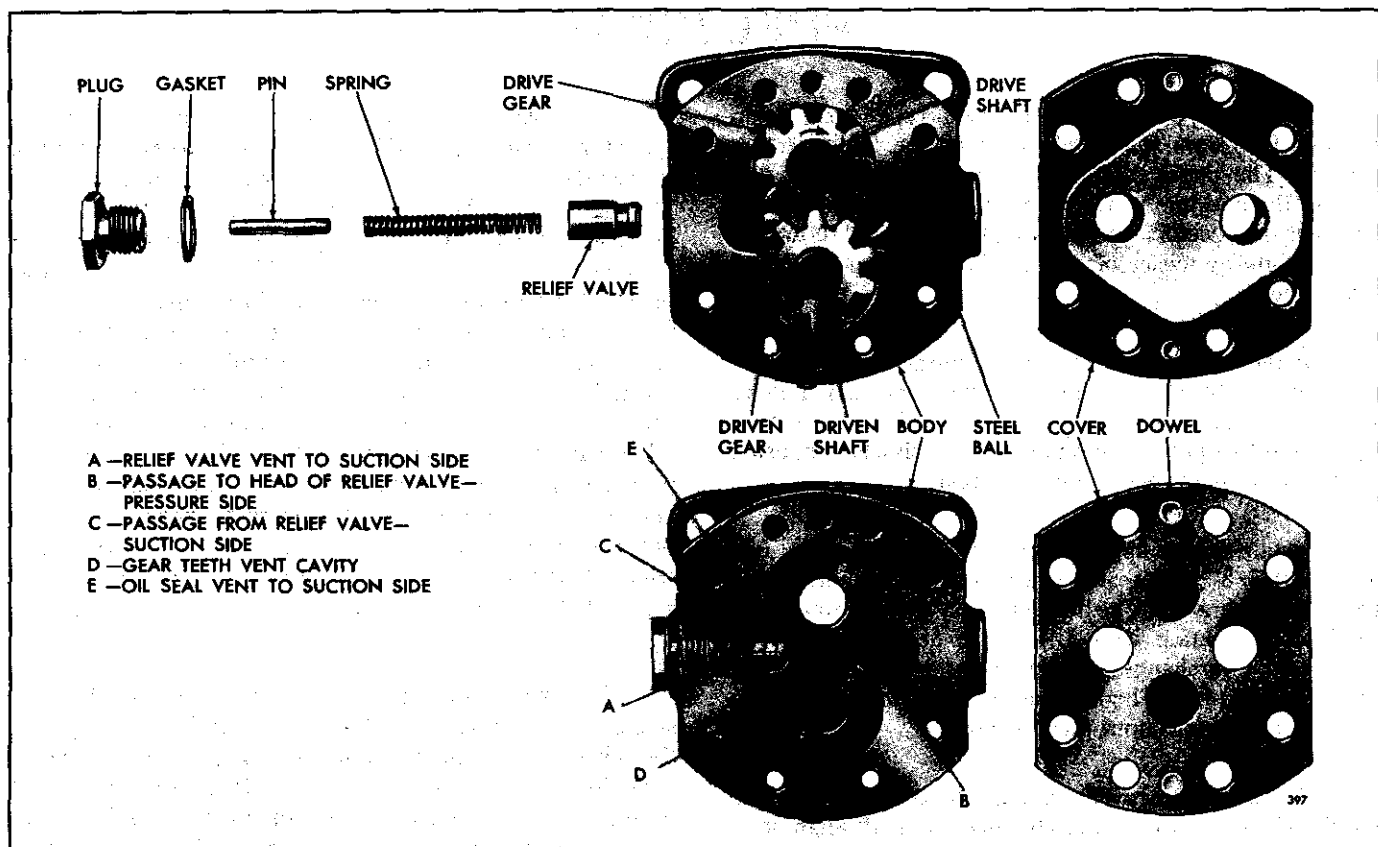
Fuel Pump Valving and Rotation (Right Hand Pump Shown)
